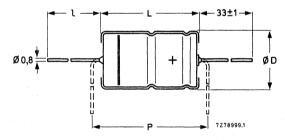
Style 1; see Table 1a for dimensions D, L, I and P.
